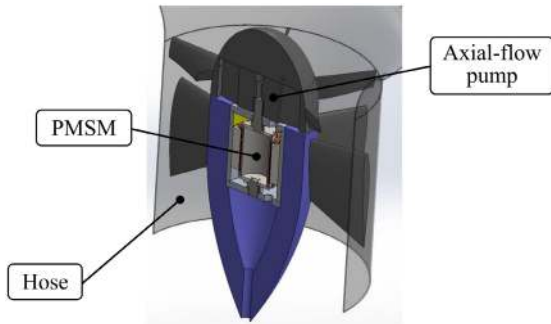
Cross-sectional view of the axial-flow pump impeller with the integrated PMSM.
